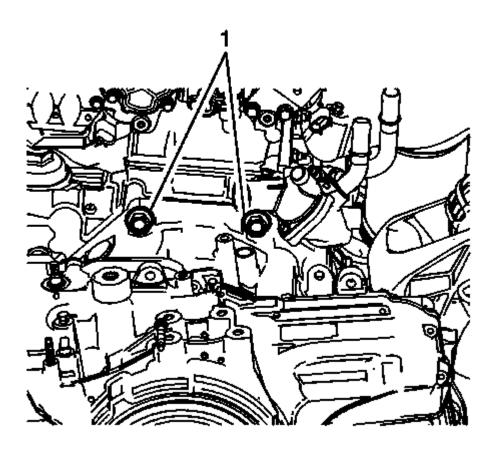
View Of Crankshaft Sprocket Courtesy of GENERAL MOTORS COMPANY
